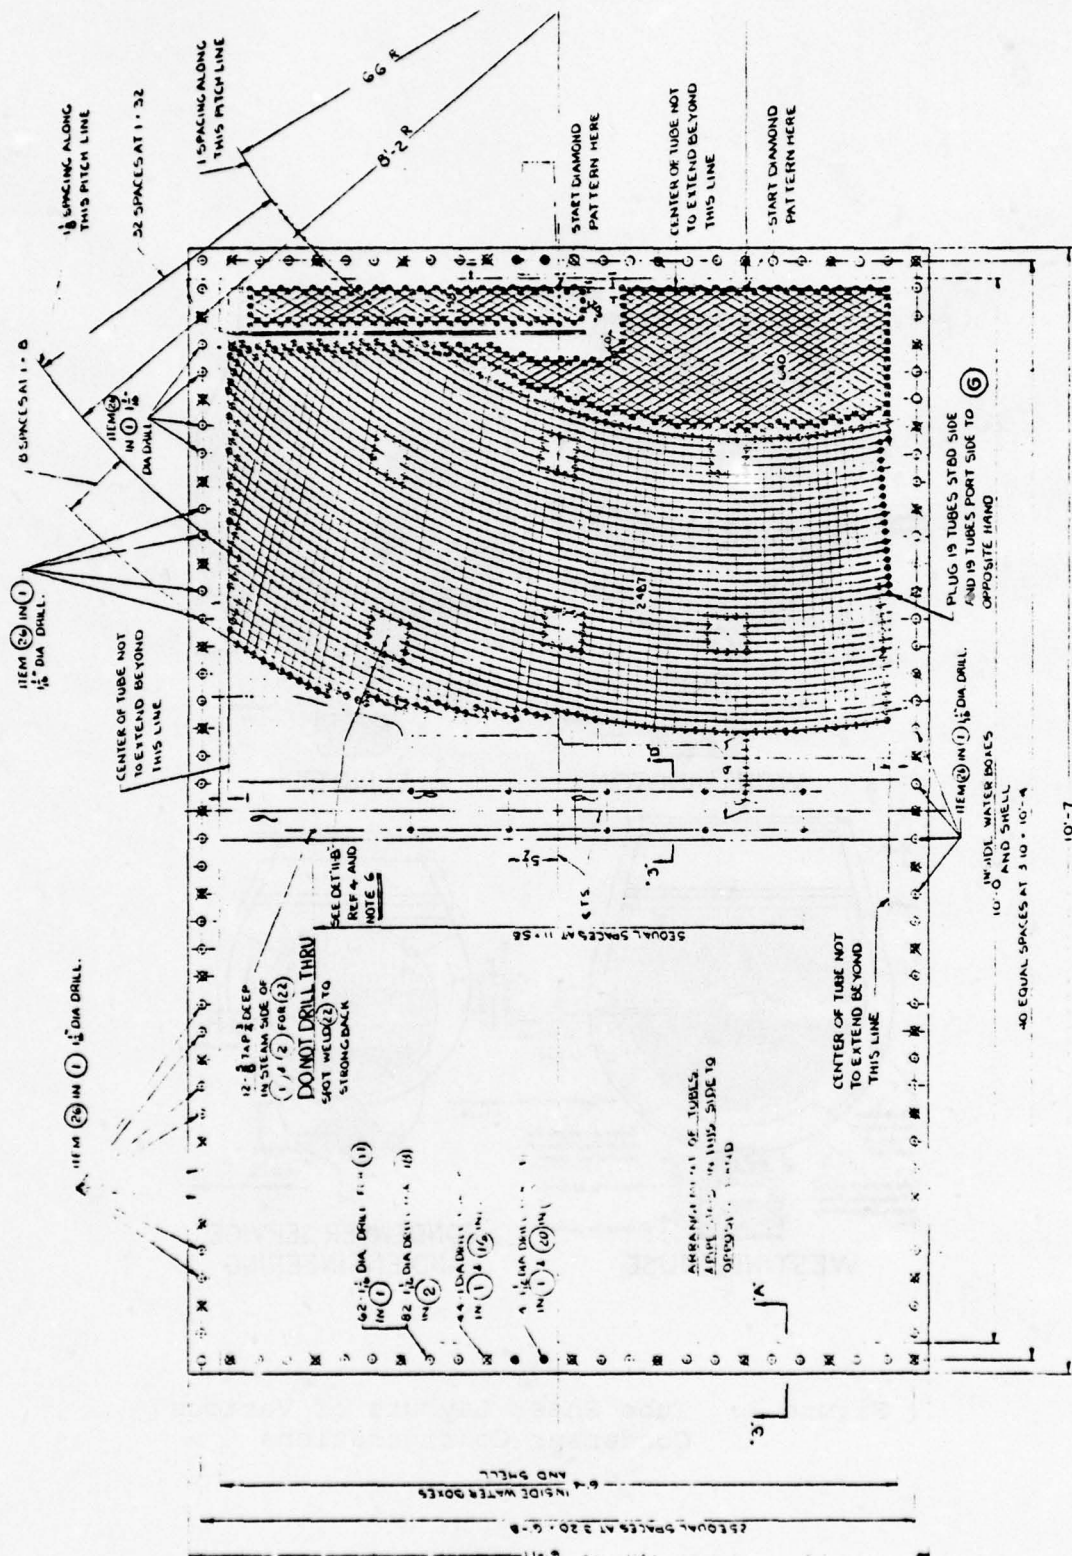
Main Condenser Tube Sheet Layout on CVA-67,
